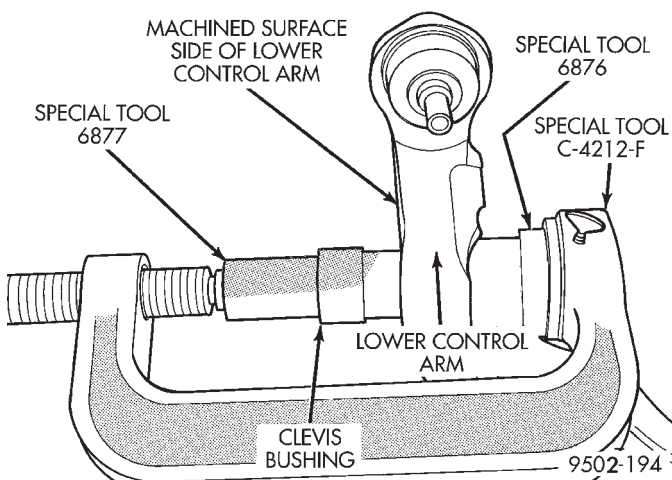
Installing Clevis Bushing In Lower Control Arm
